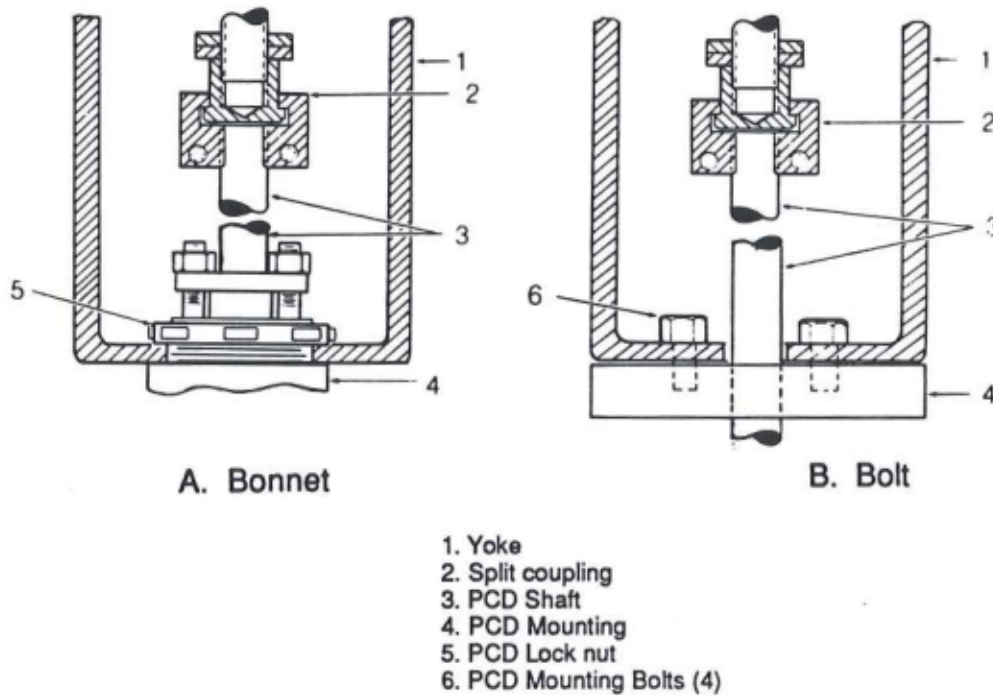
A/B. Typical Hydramotor Bonnet/Bolt Mounting
